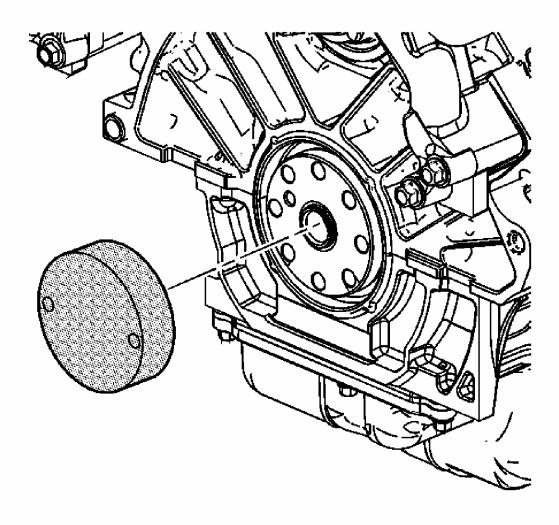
Identifying Rear Seal Pilot Base Courtesy of GENERAL MOTORS CORP.
